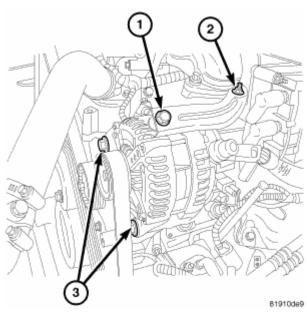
Generator Mounting 3.8L Courtesy of CHRYSLER LLC
